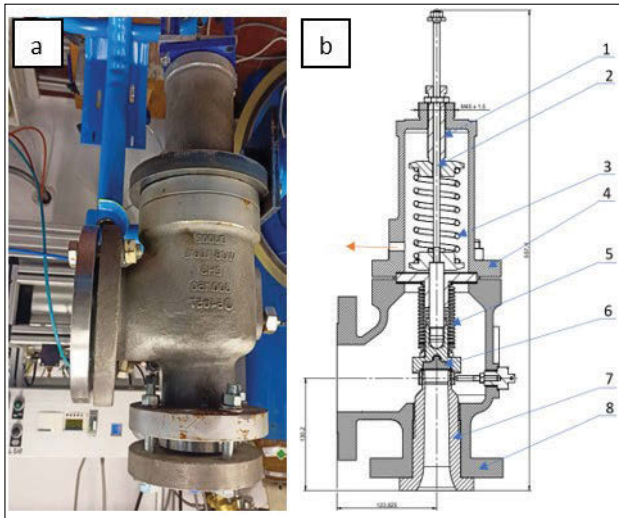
Model of balanced safety valve design 2H3 300/150, a) overall view, b) cross-section; 1 – regulation screw, 2 – valve stem, 3 – spring, 4 – cap, 5 – bellows, 6 – valve head, 7 – screw-in valve seat, 8 – body;
